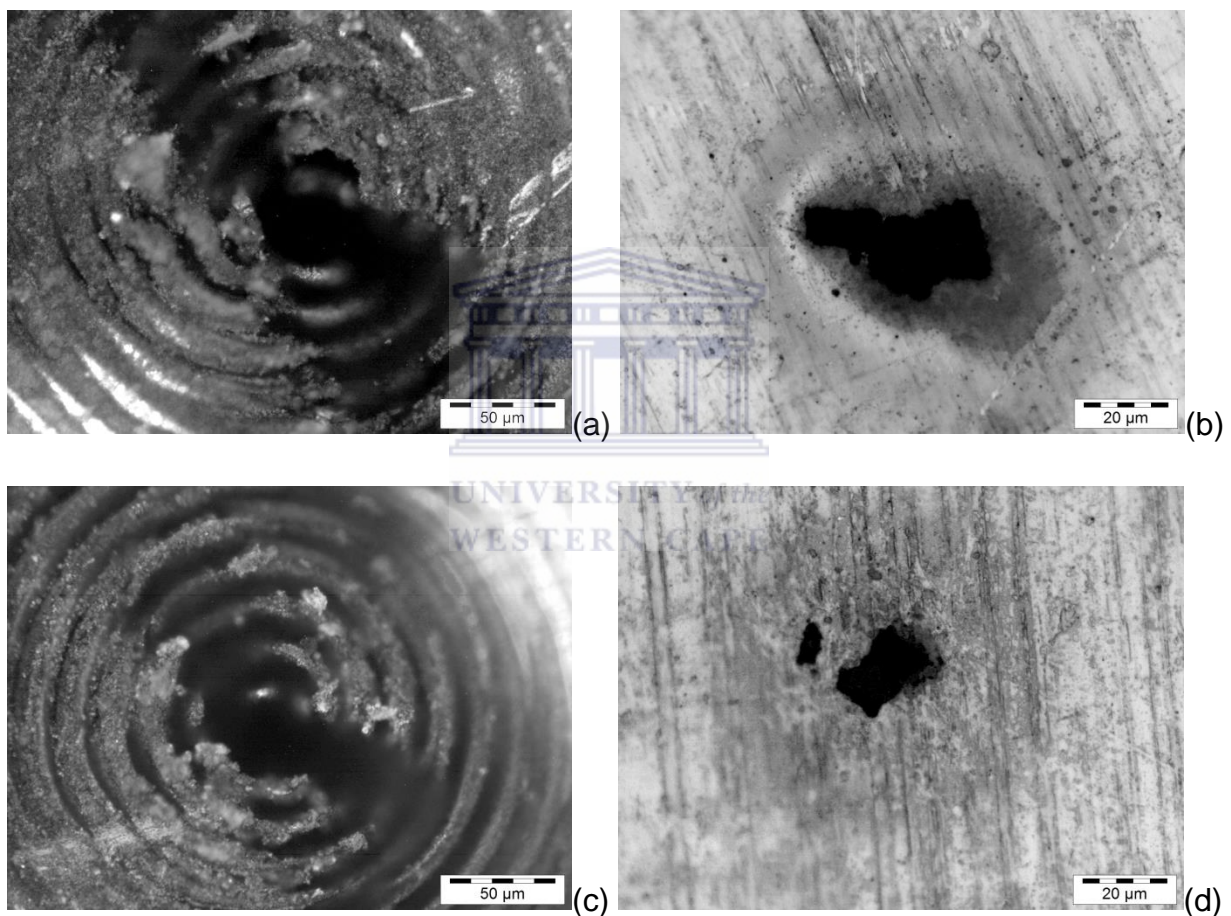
Images of laser drilled holes on a 100 μ m stainless steel sheet. (a) Top surface of the sample and (b) exit hole drilled without the shielding gas. (c) Top surface of the sample and (d) exit hole drilled with a shielding gas, Argon.
